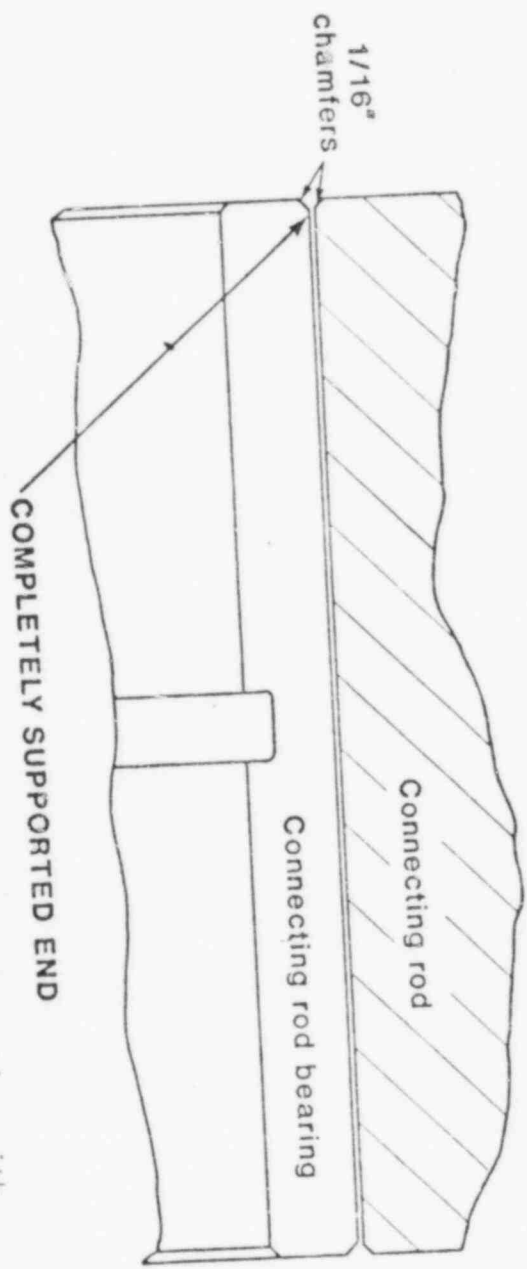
Bearing: Connecting rod configuration with replacement 12" journals.
